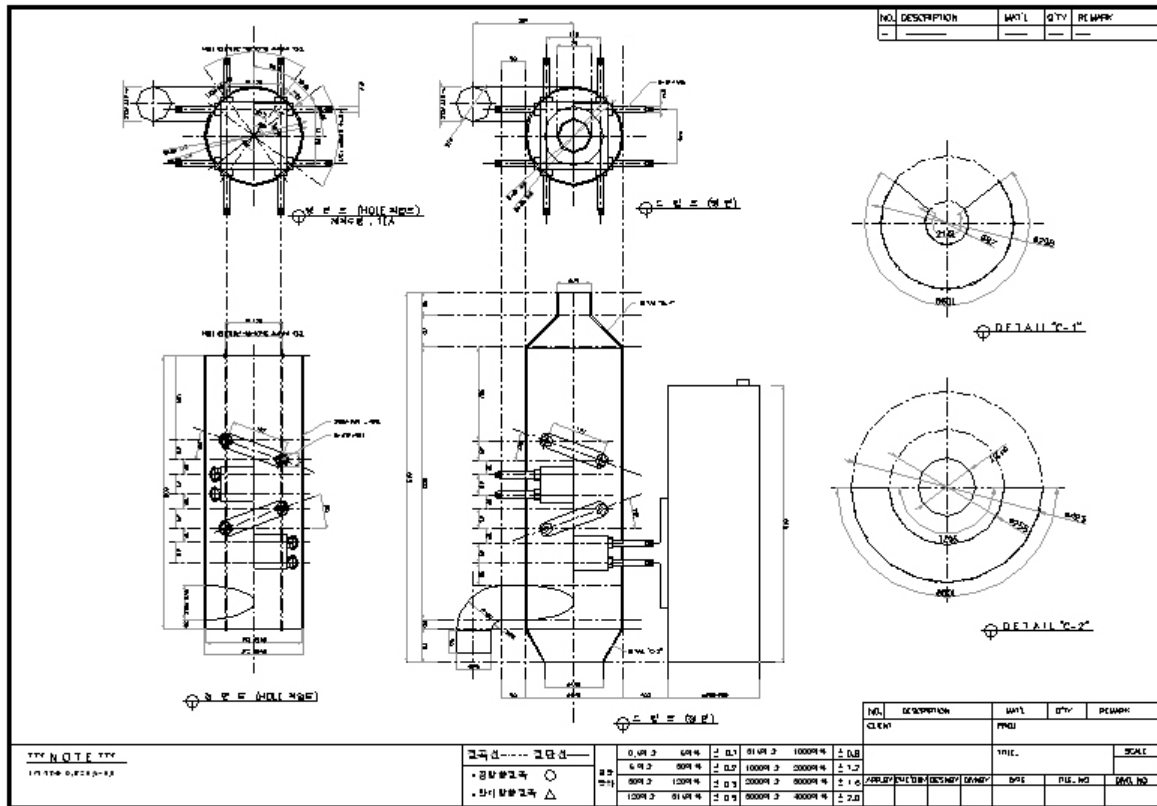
Assembled drawing of heat exchanger using waste gas.
